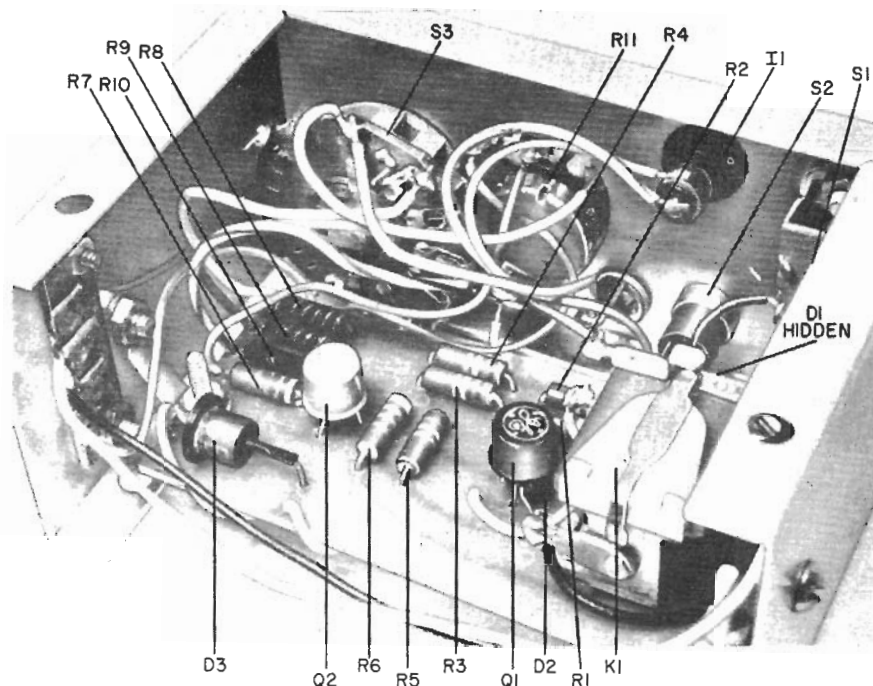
Although printed circuit board construction is shown, circuit is simple enough to be assembled with point-to-point wiring. Terminal strip at left is for power inputs.
